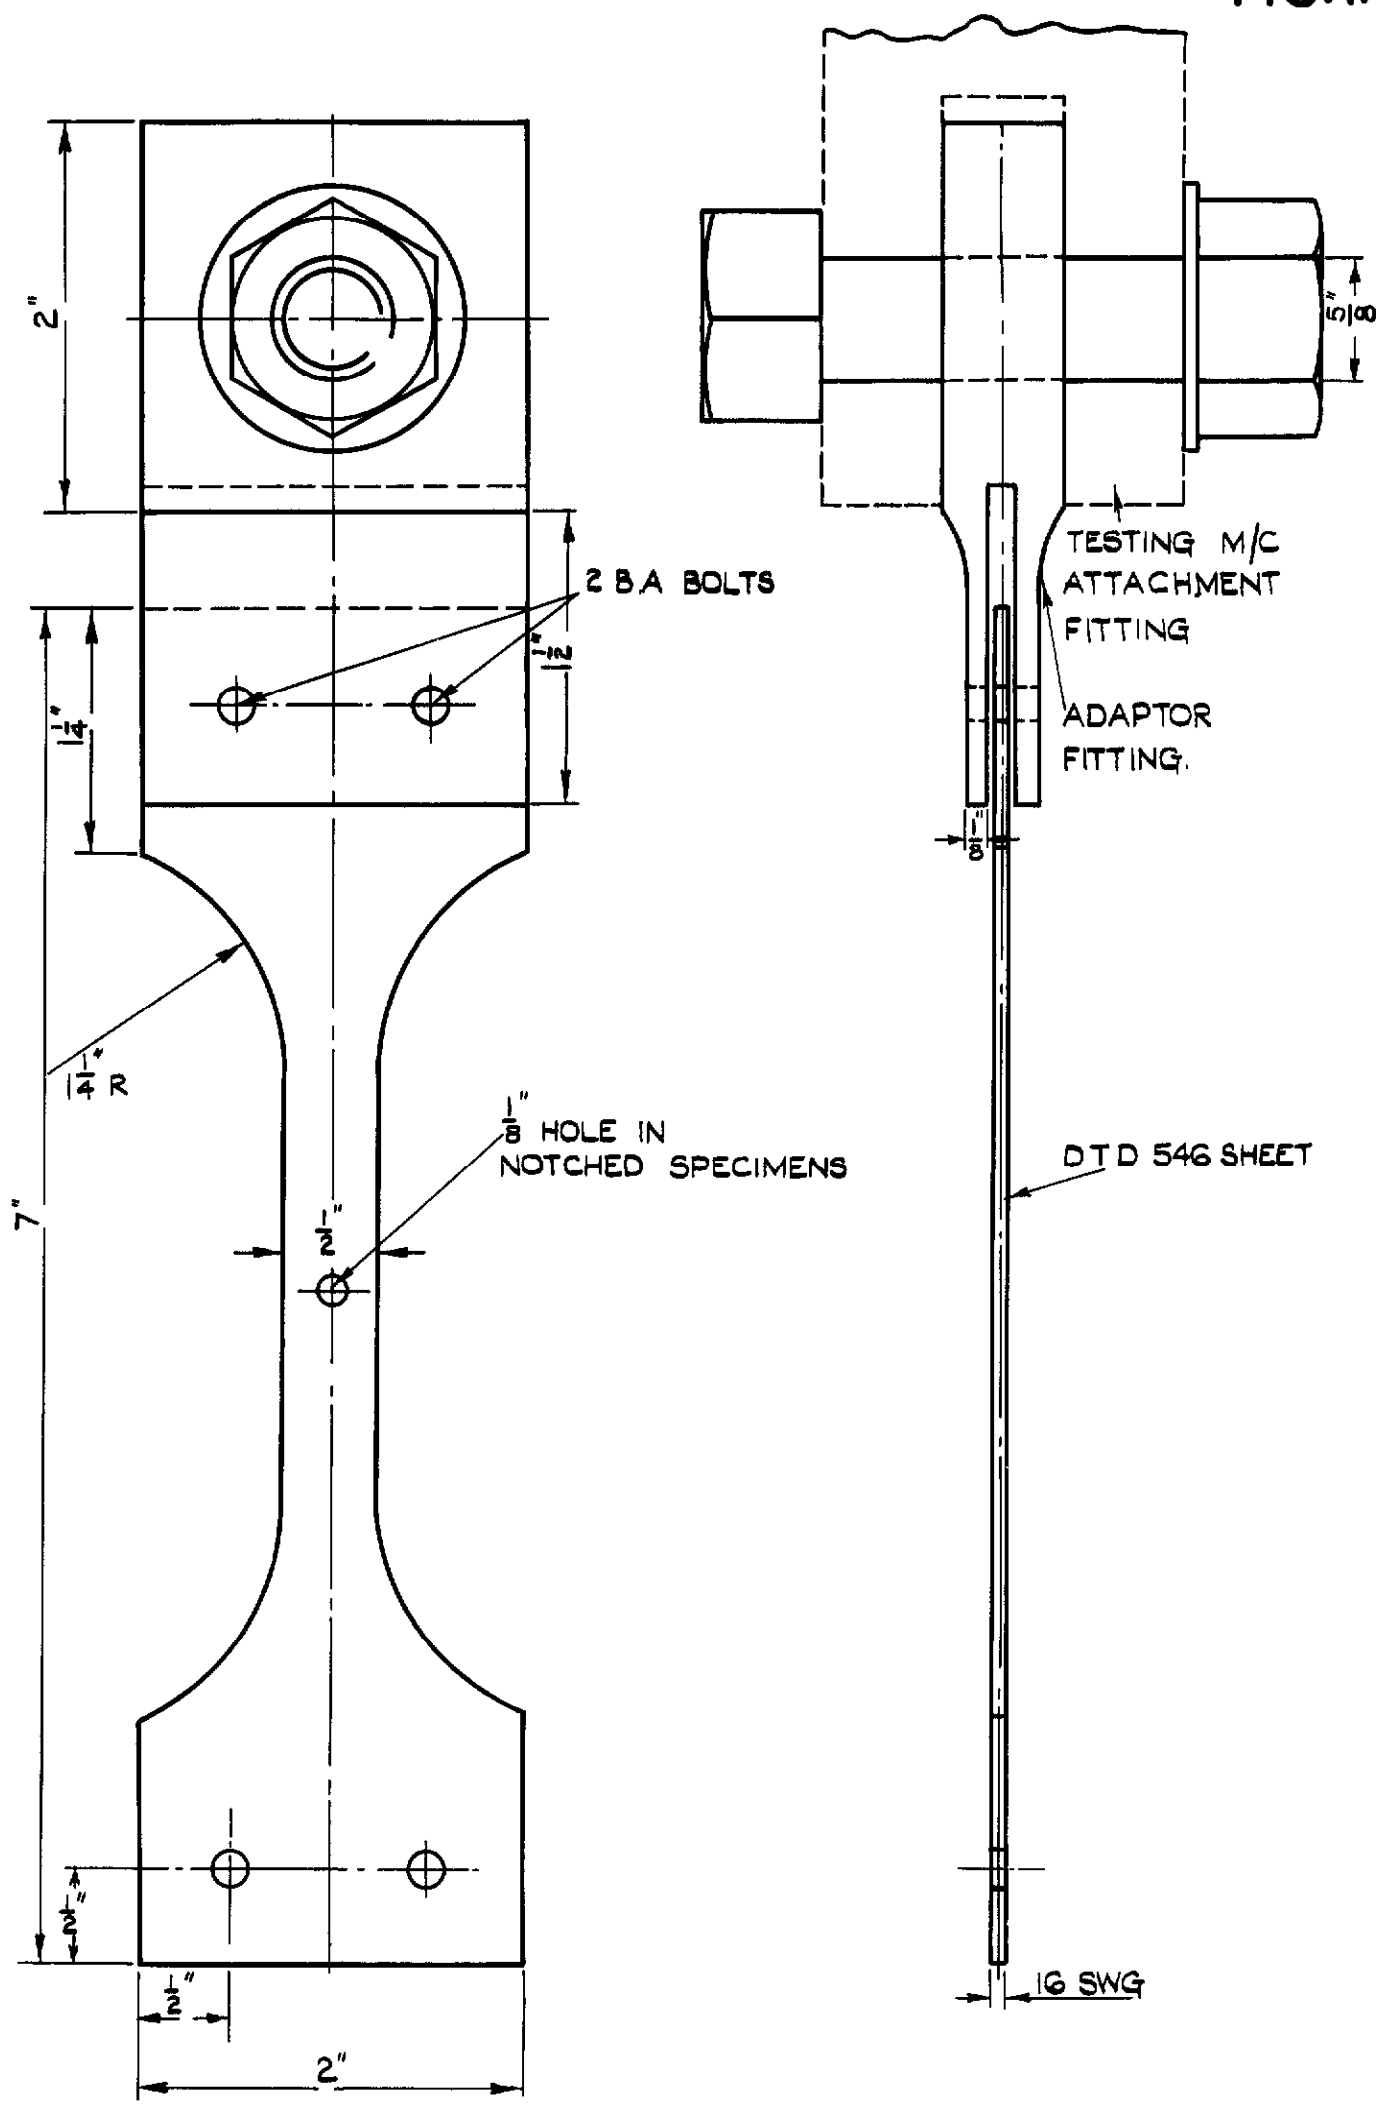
FIG. I. DETAILS OF SHEET SPECIMENS (APPENDIX I)
